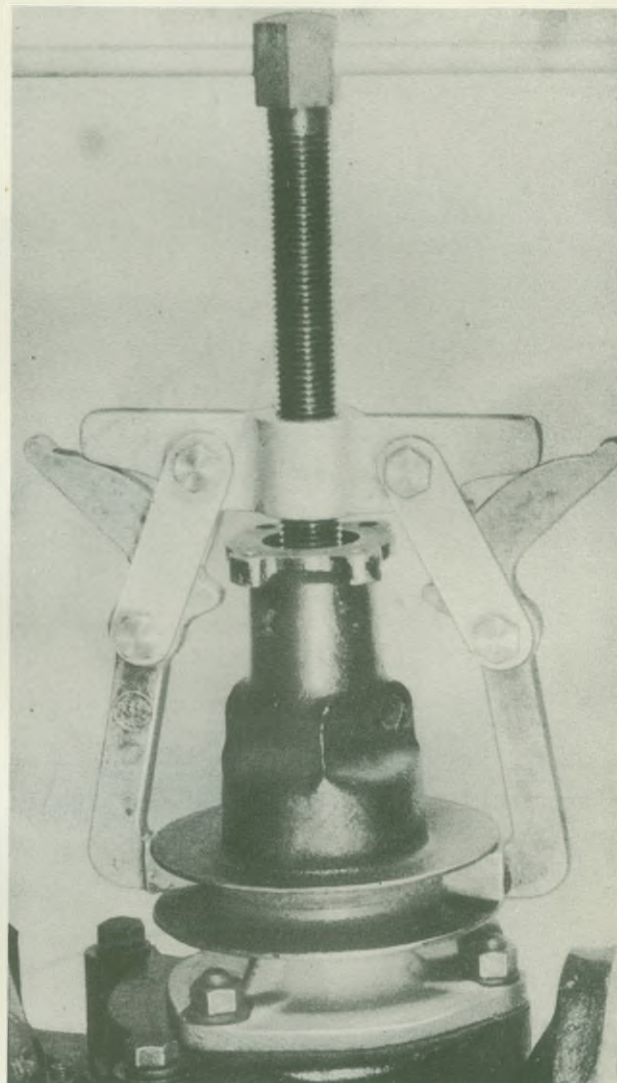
Drawing fan pulley with Churchill extractor. This extractor may also be used on crankshaft pulley.
